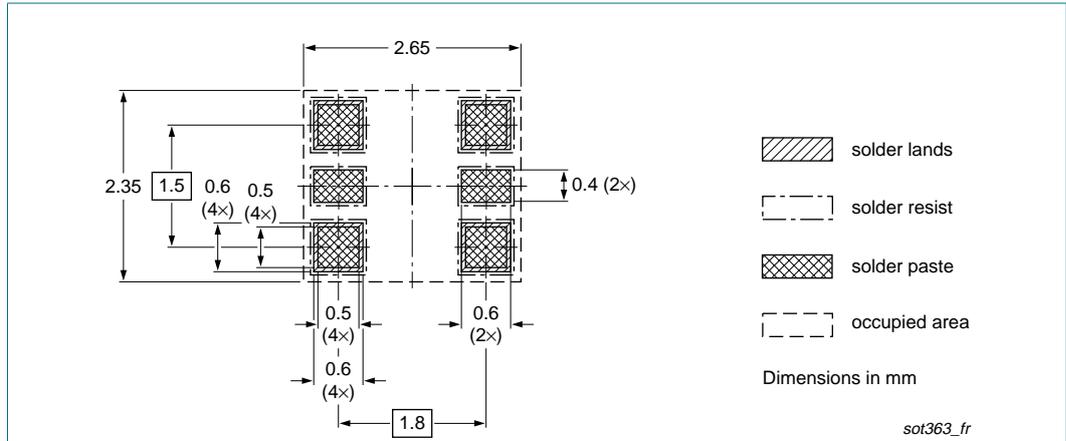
Reflow soldering footprint SOT363 (SC-88)
